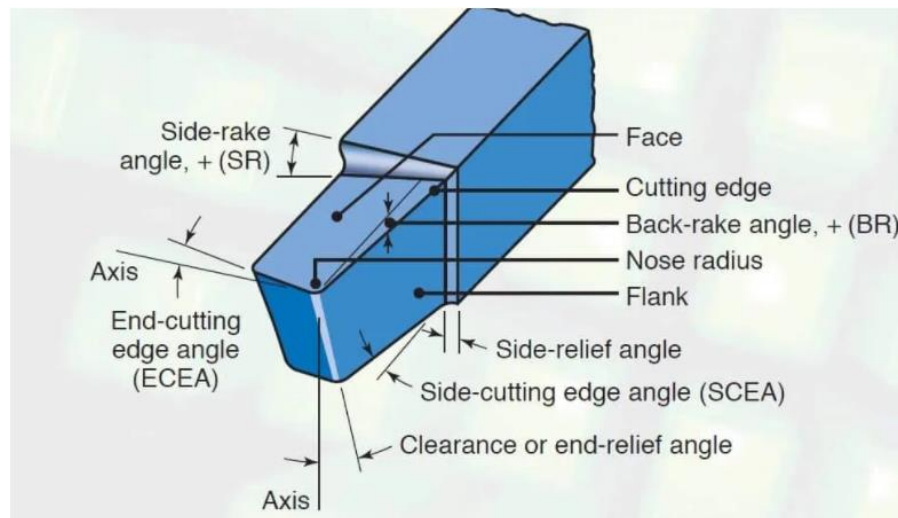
Nomenclature of Single Point Cutting Tool [27]
